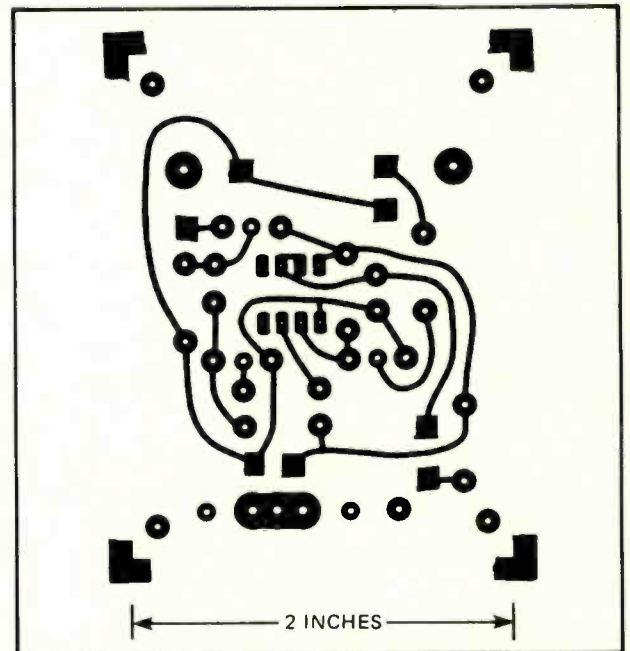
LAYOUT OF THE PRINTED CIRCUIT BOARD is shown full-size for those who want to construct their own.
